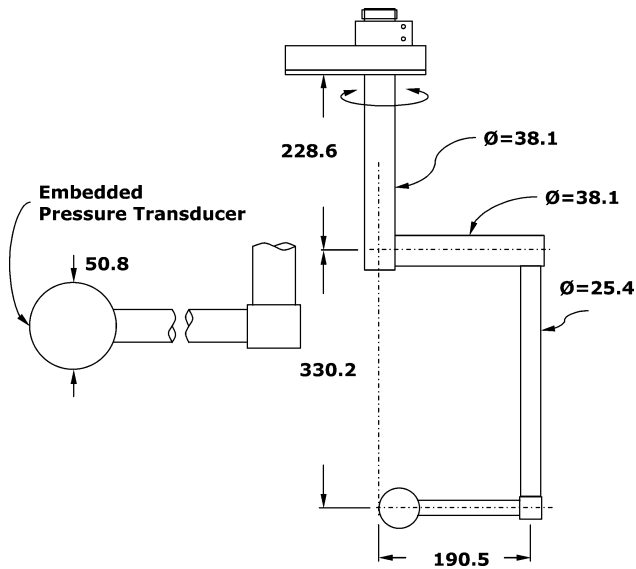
Probe mounting assembly (dimensions in millimeters). The probe can be rotated by 360 deg.
